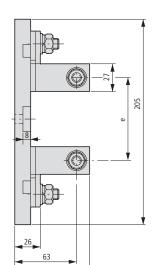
Dimension drawing DS7 with SWD – Size 4 (135 – 200 A)
